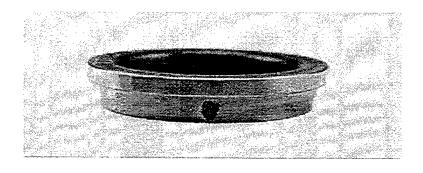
Photo of Plain Bearing Spall Which Failed at 619 Hours.
